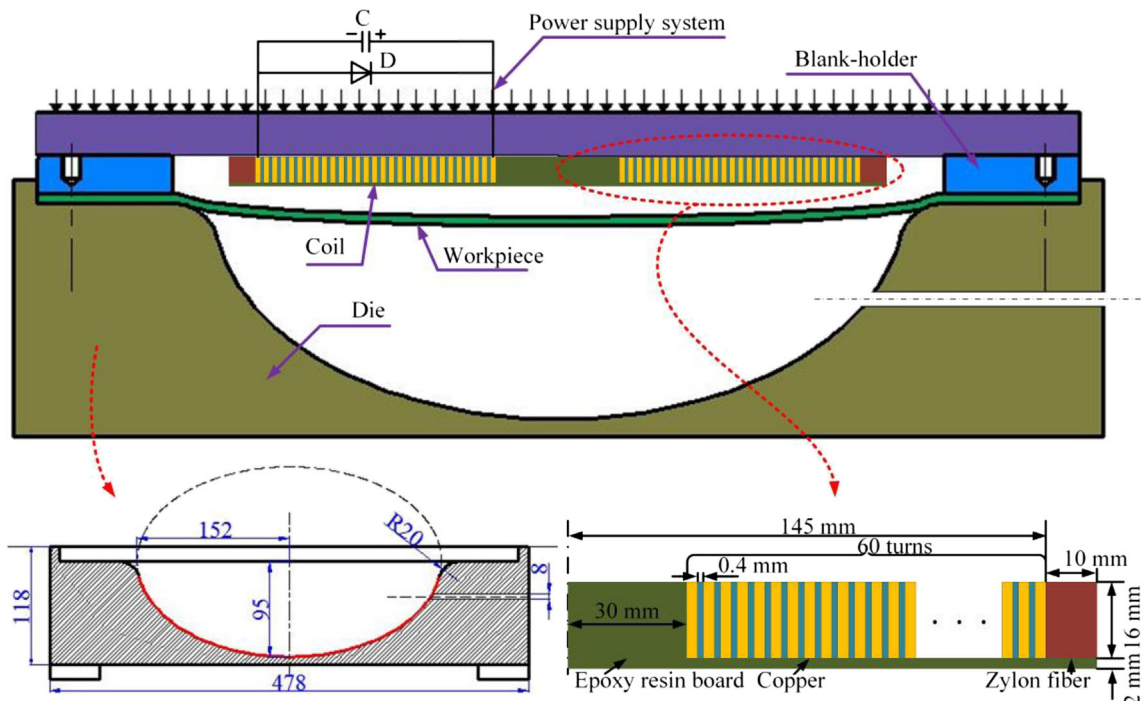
Assembly of the electromagnetic forming system and detailed structures of the forming tools
